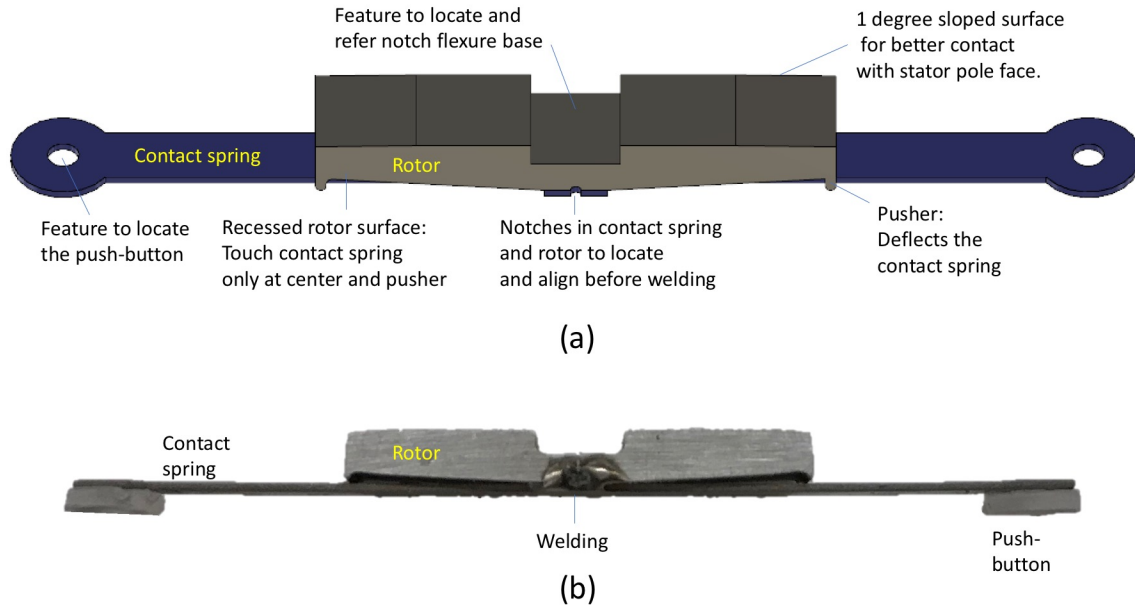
Rotor and contact spring showing details of the modifications to improve performance. (a) CAD model describing the various features. (b) Photograph of the assembly showing the push-buttons bonded to the contact spring and the contact spring micro-TIG welded to the rotor.
